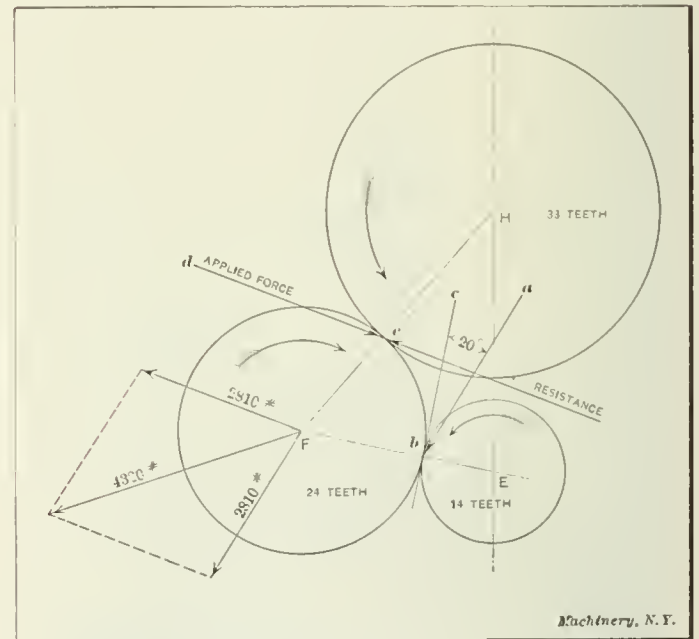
One of Two Possible Arrangements of Reverse Gearing
